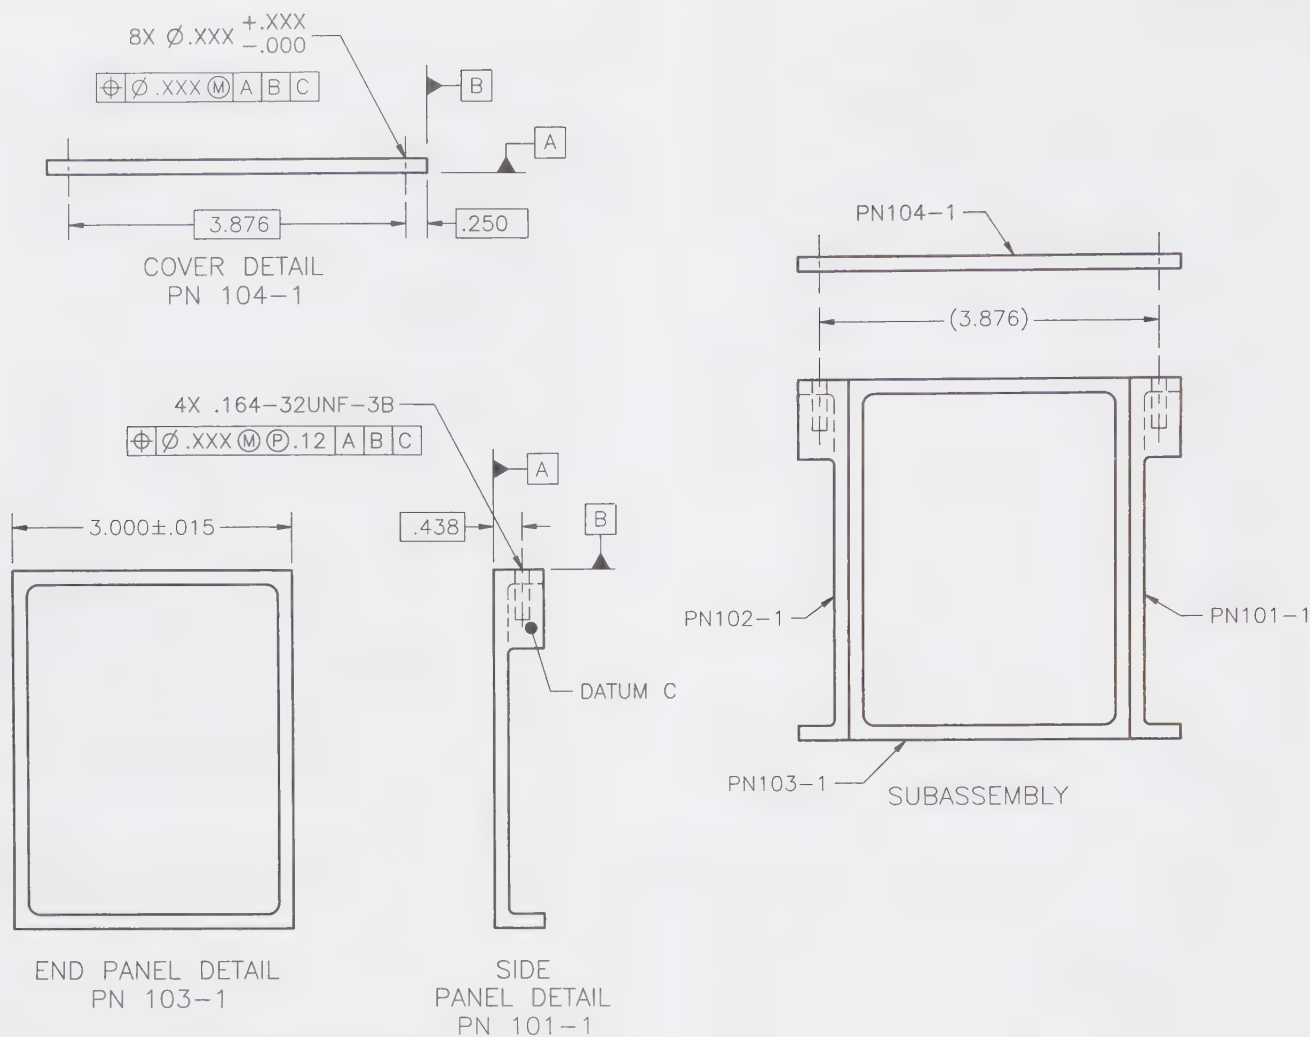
shows the top cover located above the side walls subassembly. Centerlines for the cover attachment holes are shown. On the top cover, there is a basic dimension that locates the distance between the clearance holes; that dimension is 3.876".
